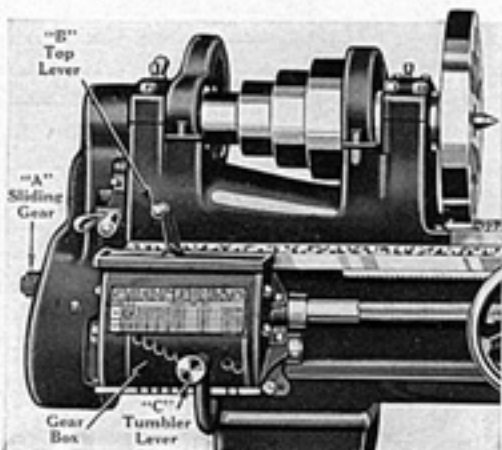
Quick Change Mechanism used on all South Bend Quick Change Gear Lathes.
